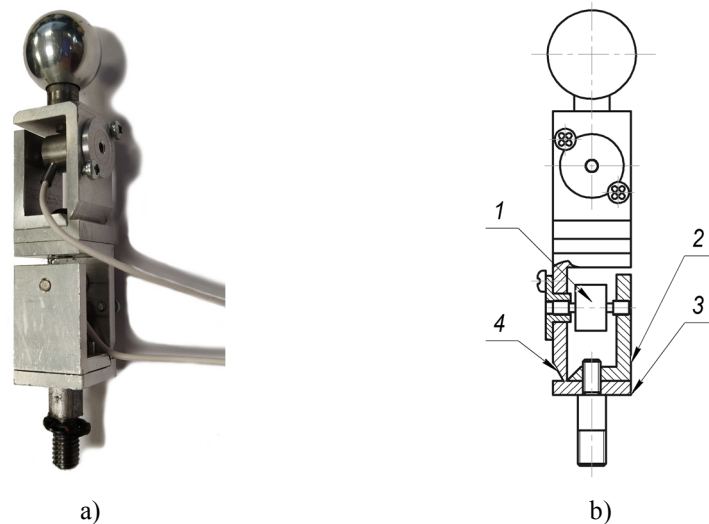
Handle design: a) manufactured prototype; b) blueprints.
